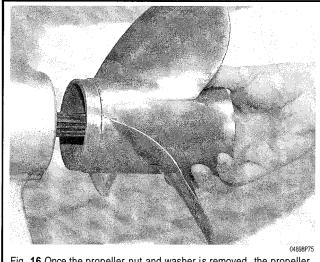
Once the propeller nut and washer is removed, the propeller can be removed by sliding it off the shaft
